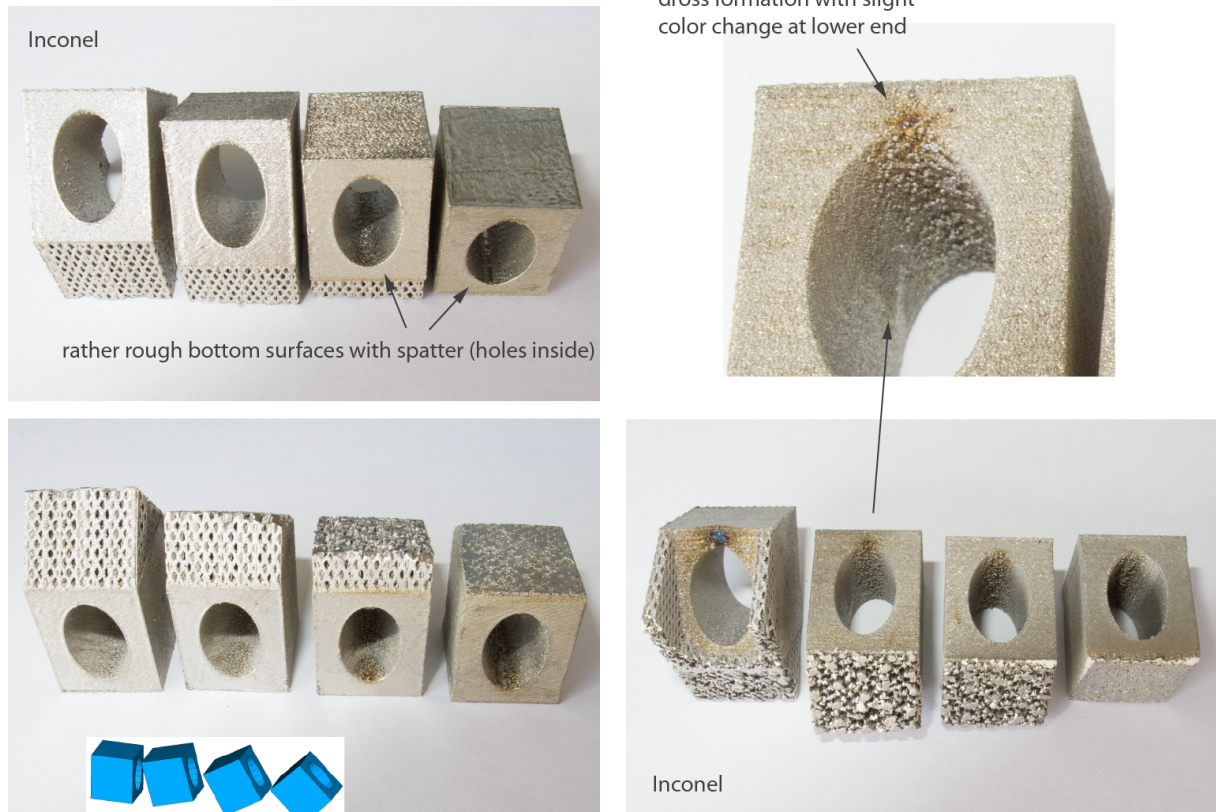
Remarks of the elliptic hole test pieces, Inconel.
